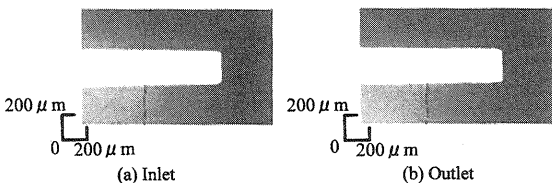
Machined micro square-groove by using formed straight electrode (Machining distance: 1000 micrometers)
